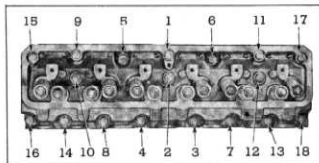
Cylinder Head Bolt Tightening Diagram (1953)
